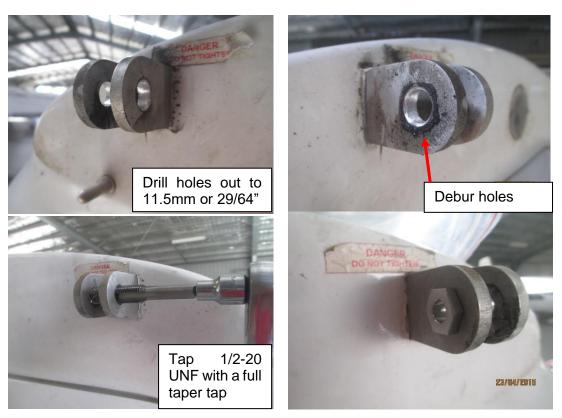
Installation of stainless steel bushes into fuselage lugs
